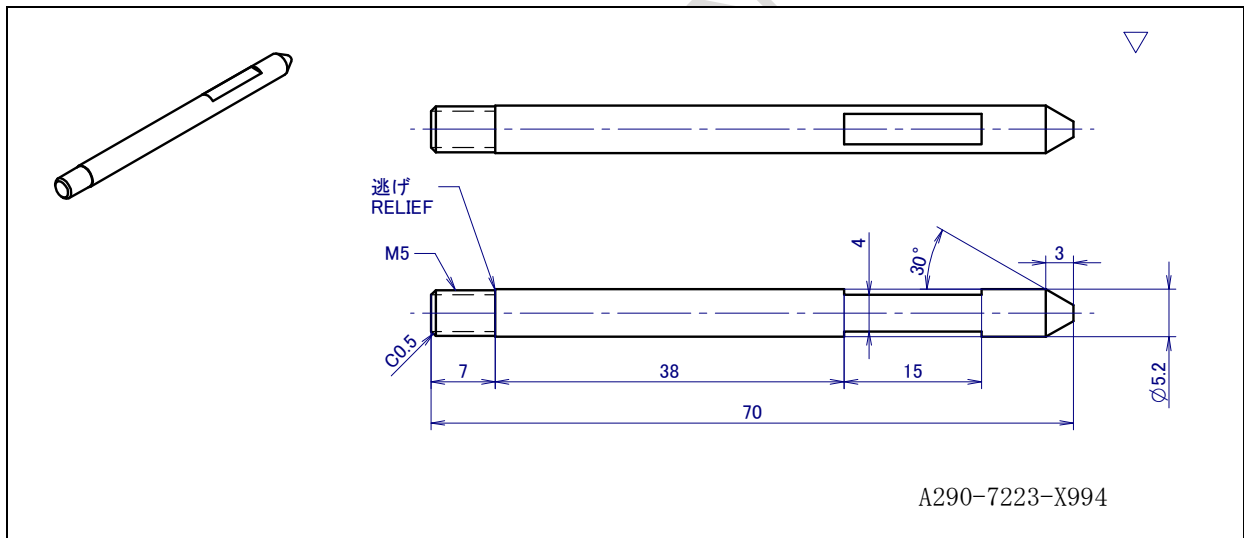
(b) Guide pin for replacing J1/J2/J3-axis reducer (M8) (A290-7223-X994)
